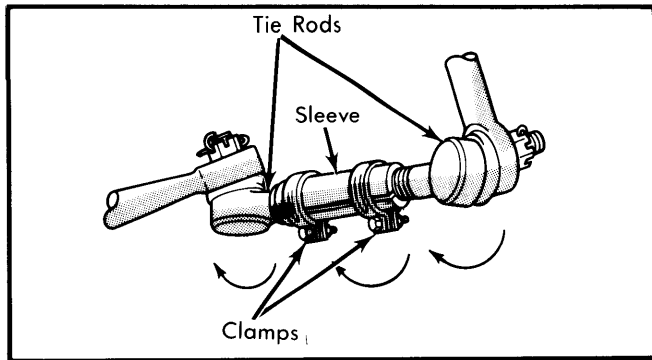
Toe-in Adjuster Tube Clamp & Bolt Position
